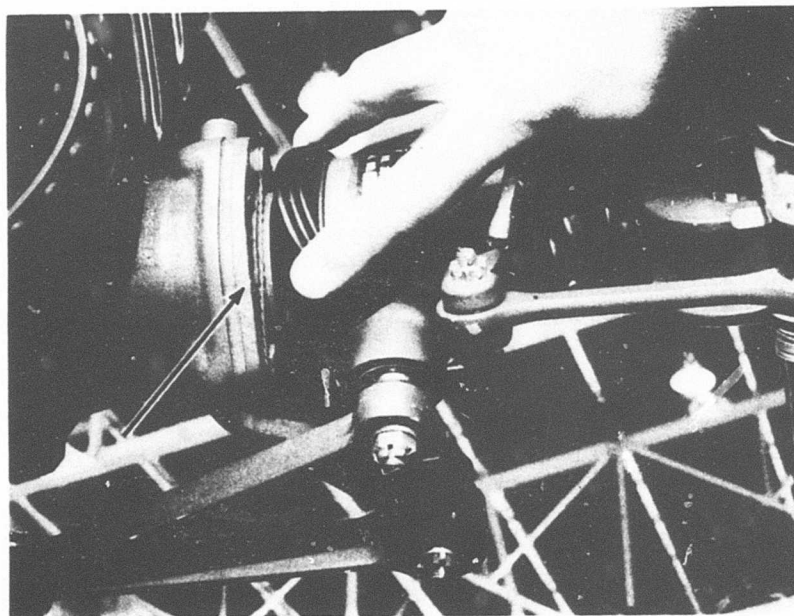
Lockwiring output cover, OH-6 tail rotor gearbox.
